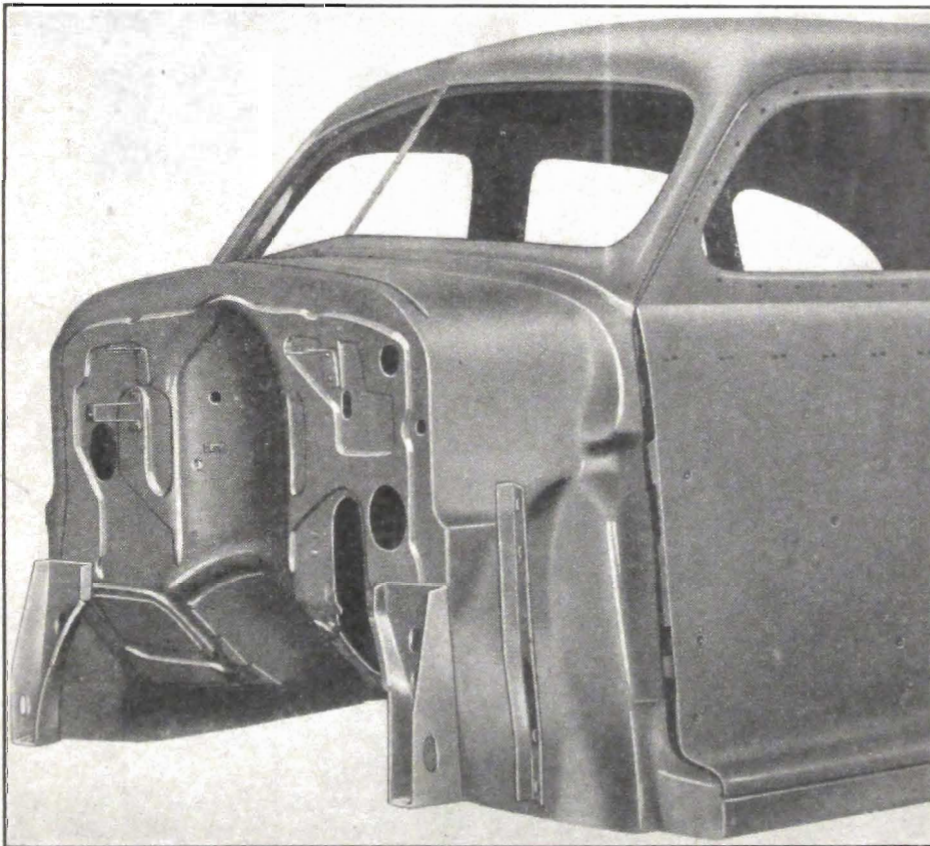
Cowl and Dash Assembly—Series 40-60
